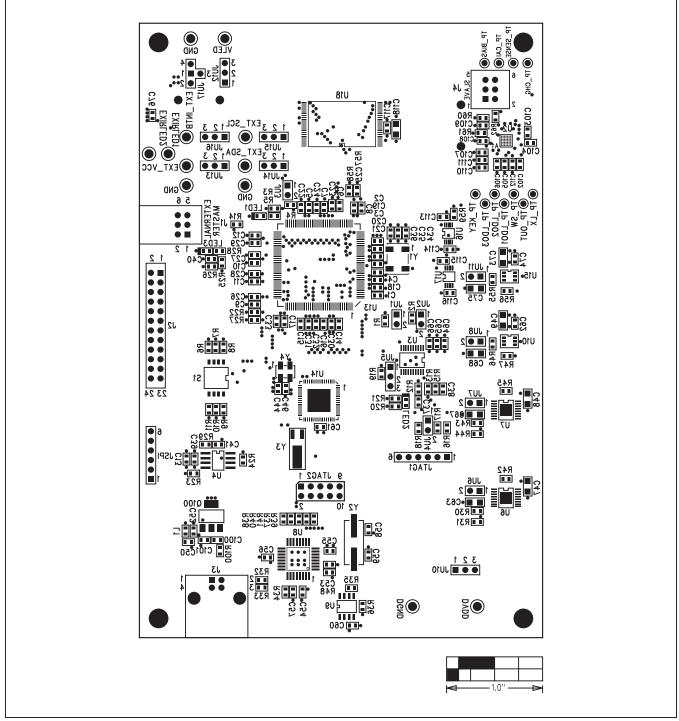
MAX44005 EV Kit Component Placement Guide-Bottom
